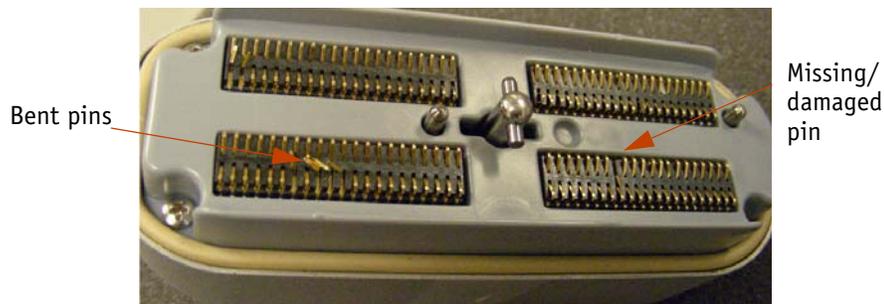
Bent, Broken, or Missing Pins on Transducer
